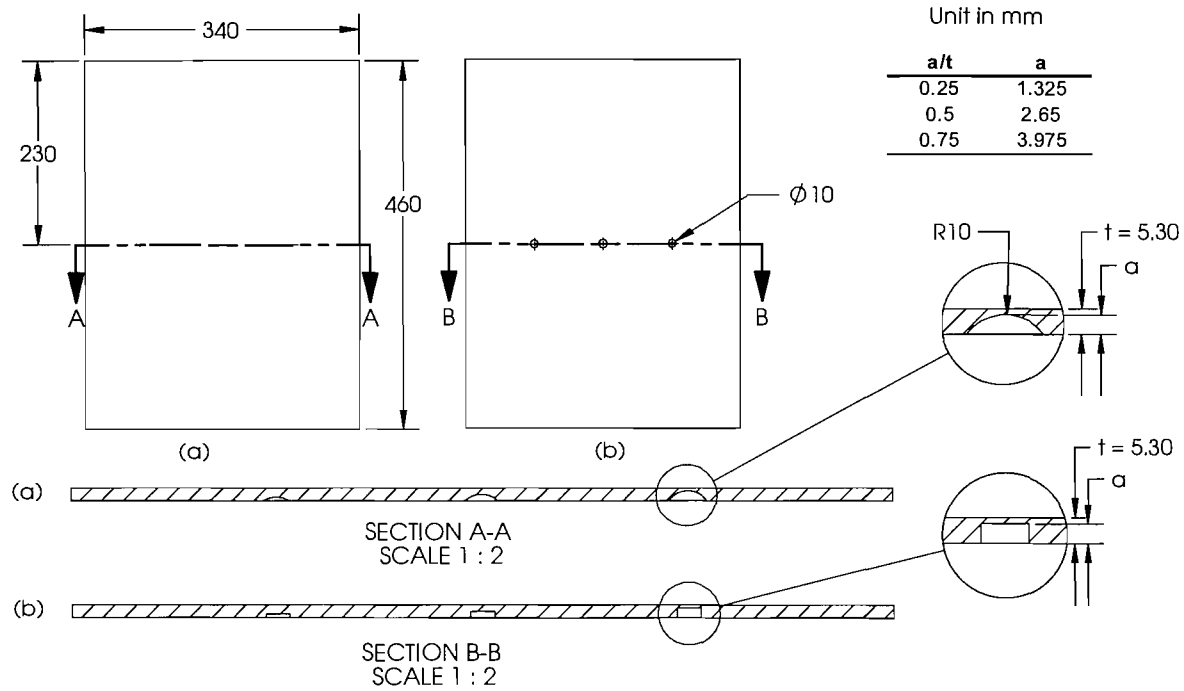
Drawings of the specimens: (a) specimen no.1: the plate with multiple EDM part-through slots, (b) specimen no.2: the plate with multiple part-through holes
